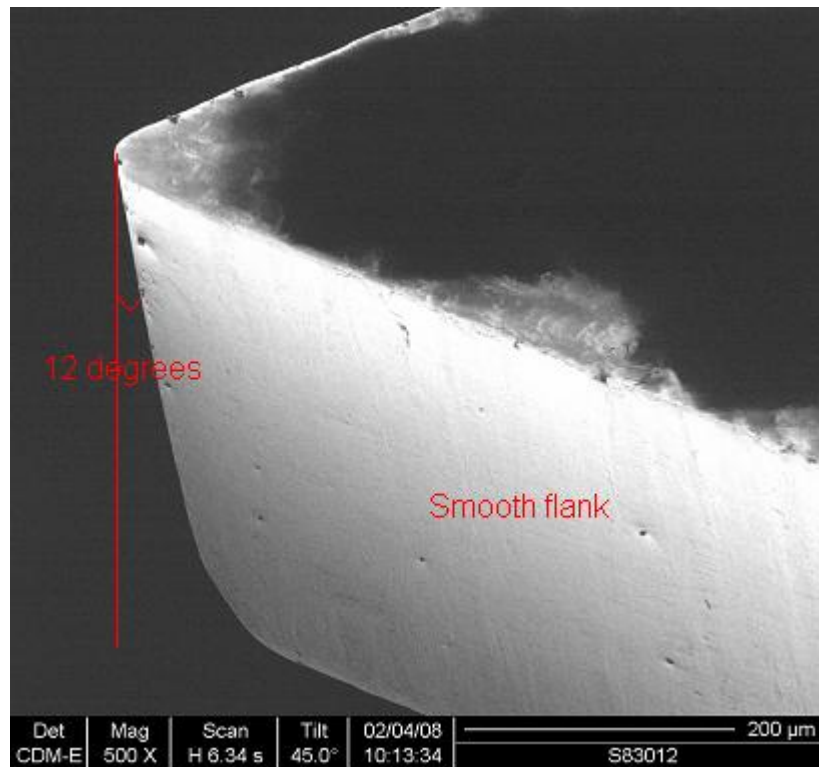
Side view of CVD tool blank showing the front clearance angle
